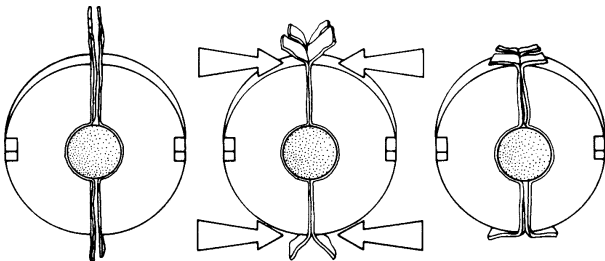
LOCK-TAPE STRIPS SEPARATED AND FOLDED BACK
